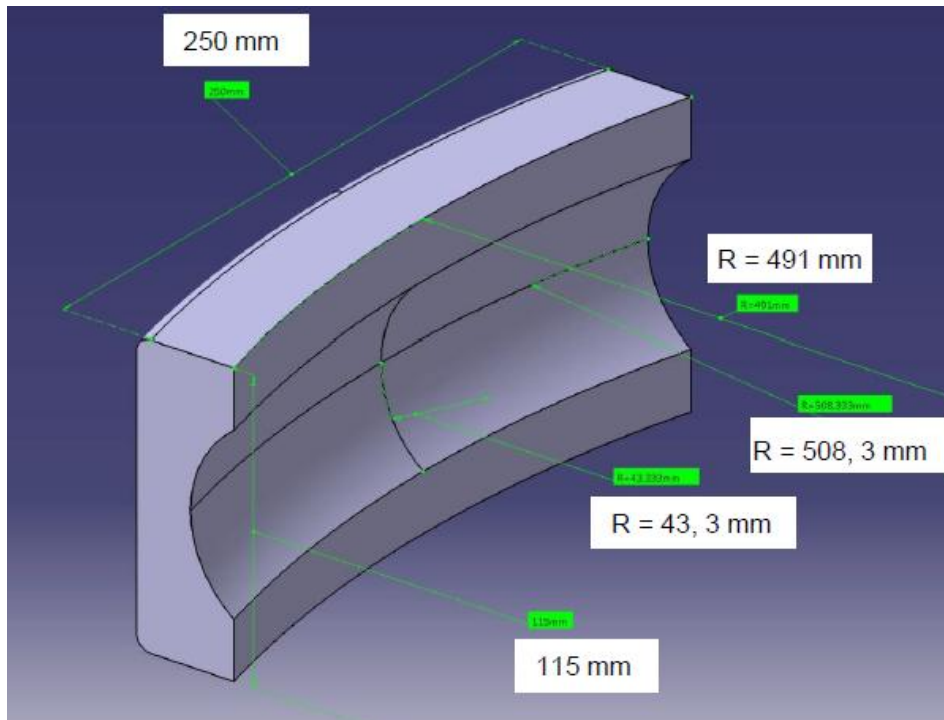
ring segment representative of bearing rings  $\varnothing > 1$  m
